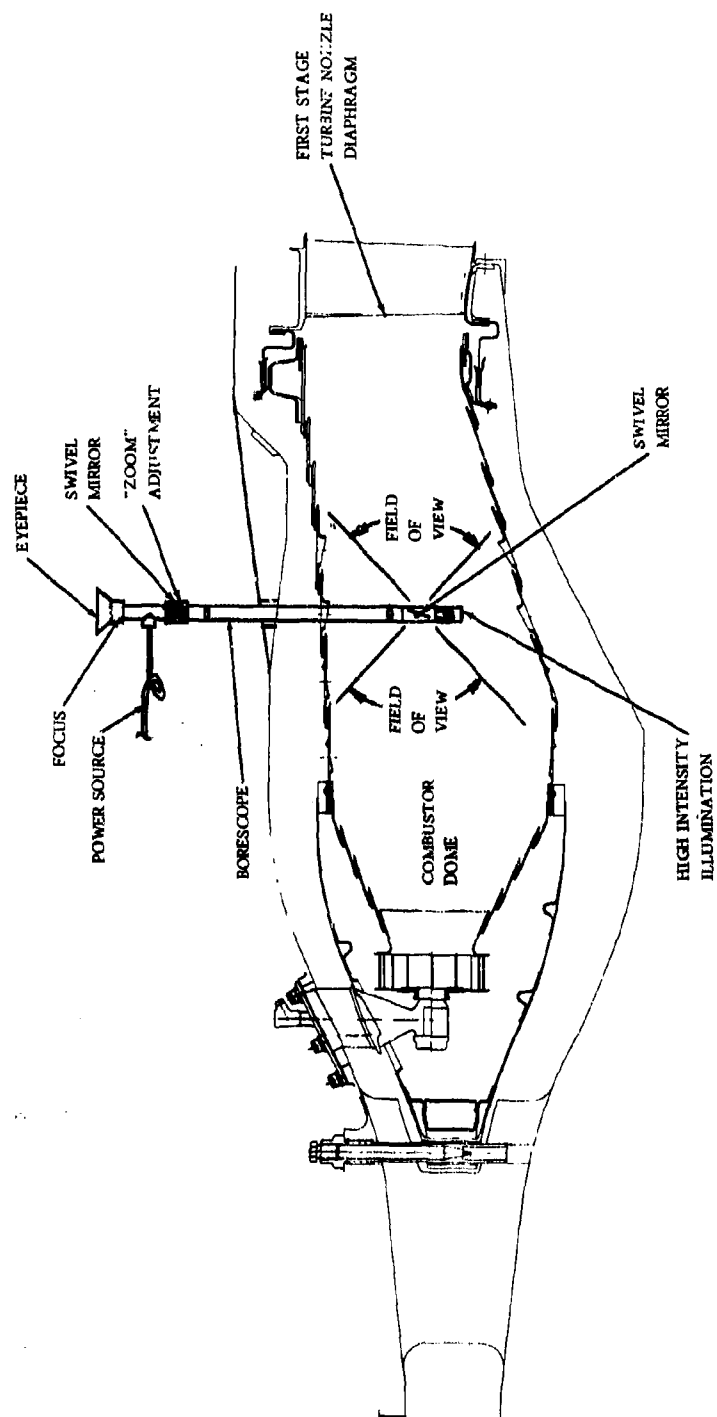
BORESCOPE INSPECTION PORT
